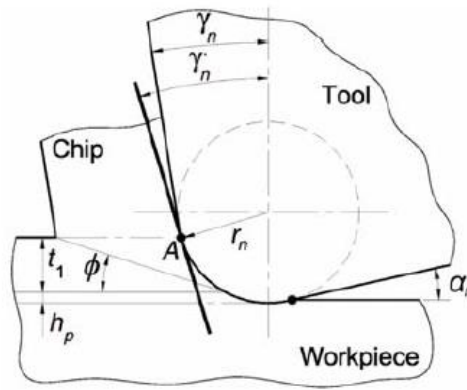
Detail of round tool cutting edge in orthogonal cutting chip formation [74]
